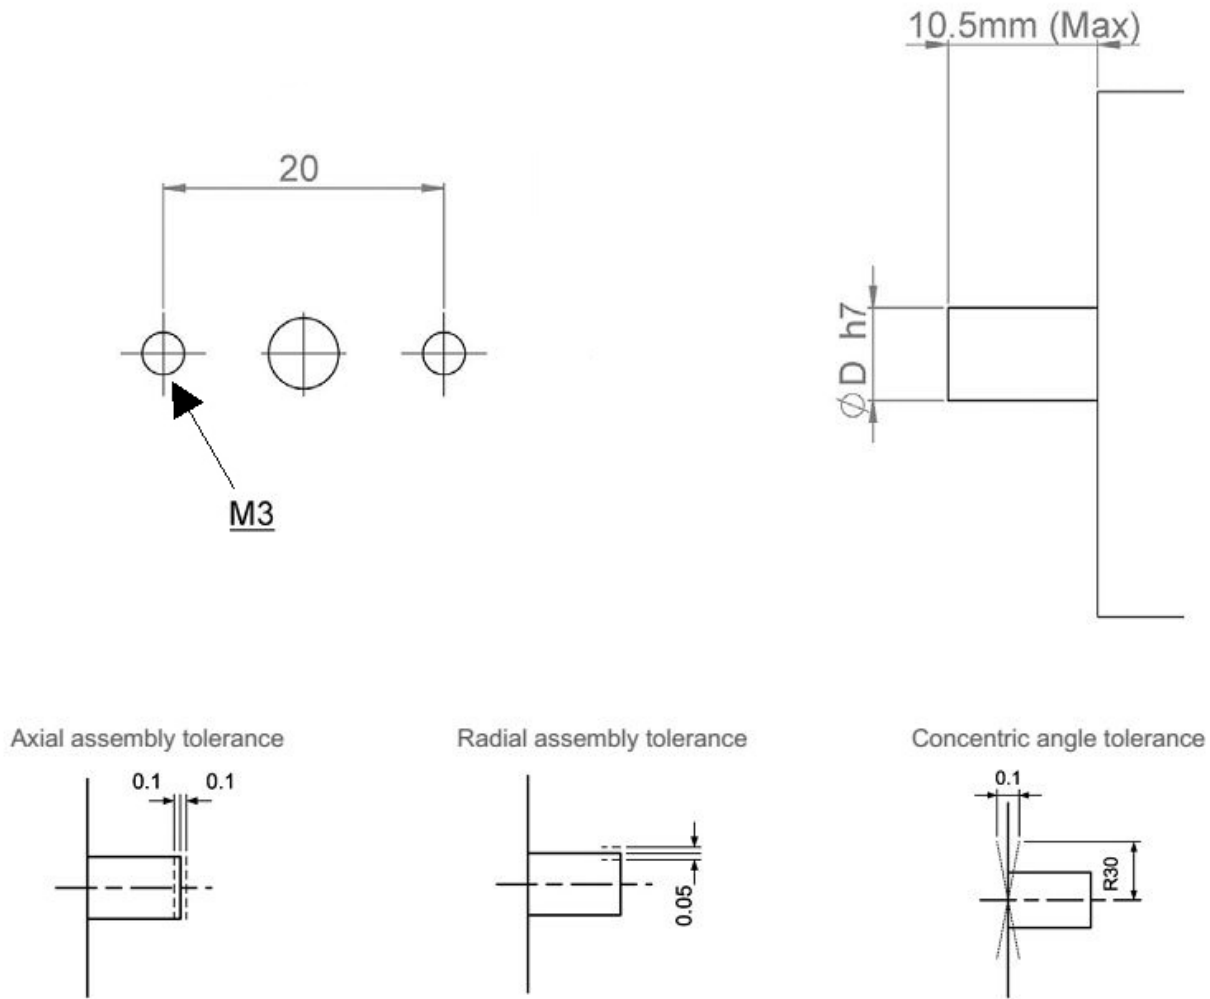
Required dimensions for motor assembly (units = mm) / $D = 5\text{mm}$ or 6.35mm
